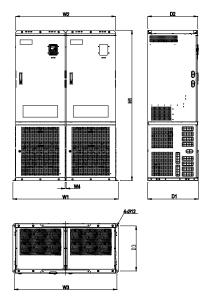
Parallel mounting diagram for 380V 710-3000kW and 660V 800-3000kW
